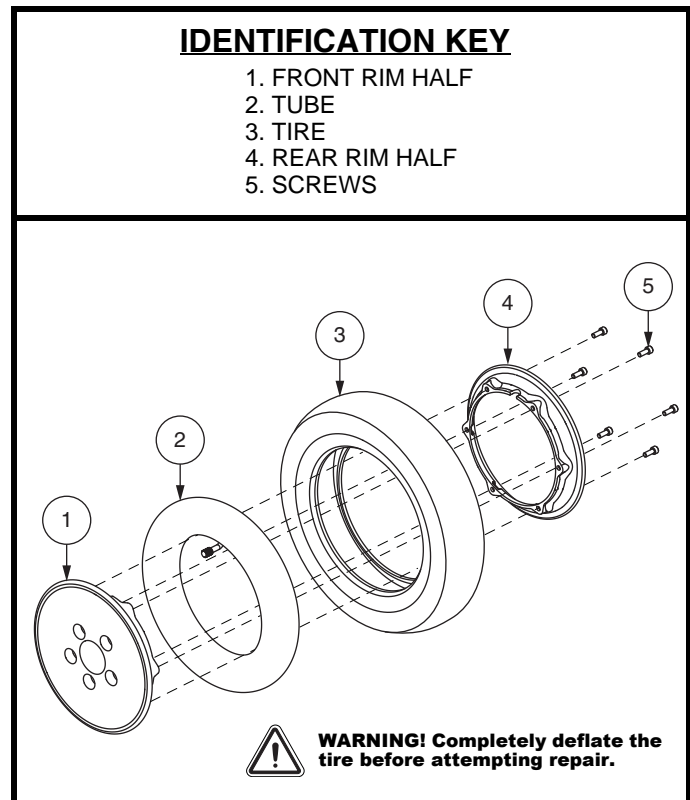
Pneumatic Drive Wheel Disassembly/Assembly
